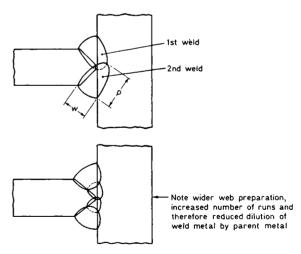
Full penetration butt weld, submerged arc
